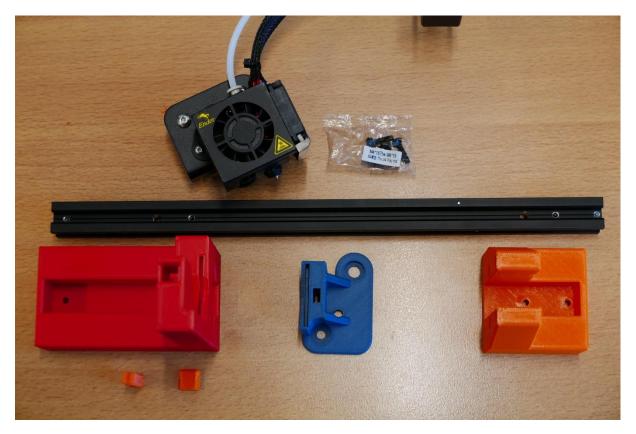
Necessary parts to build the Extruder Plate Pump Channel frame: Extruder head, M4x16 screws, 20x20 rail, E End Mount, E Slide Mount, E Stepper Mount, Clamp Bar and Dovetail Cap.
